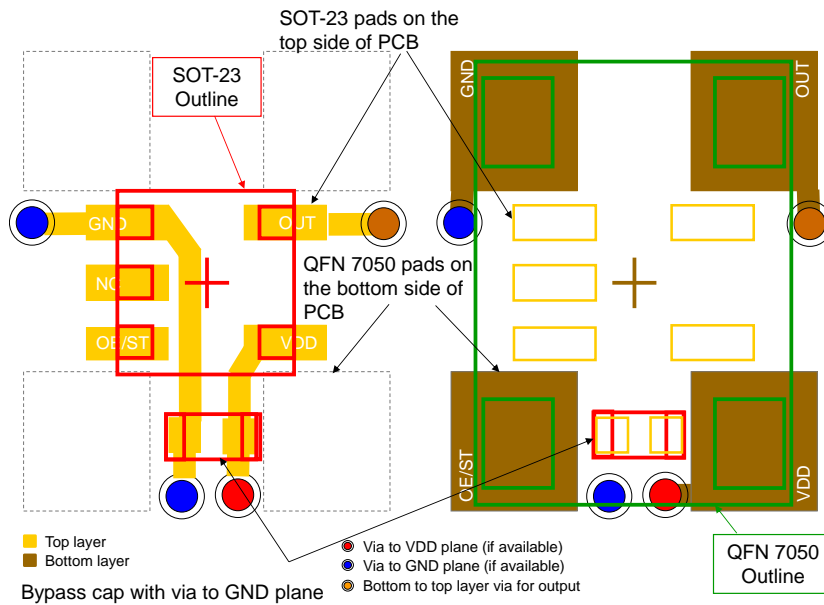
QFN 7050 and SOT23-5 stacked design layout example showing placement of both QFN 7050 and SOT23-5 devices
